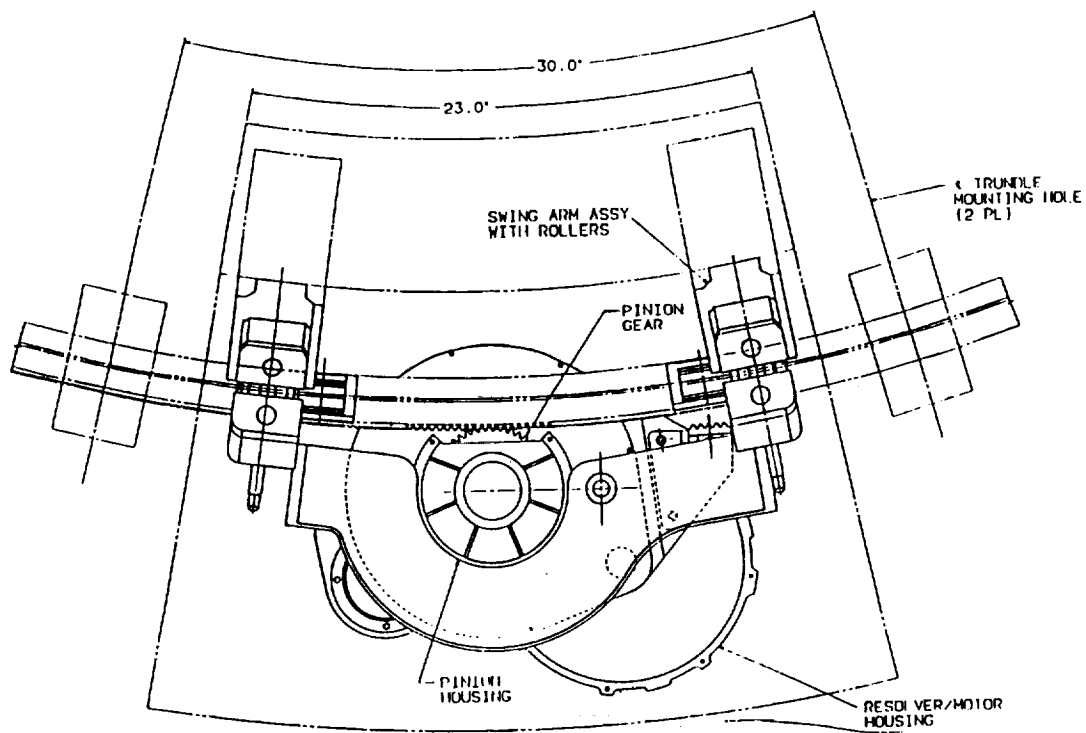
Motor-driven pinion gear drive assembly for upper and lower racerings.
